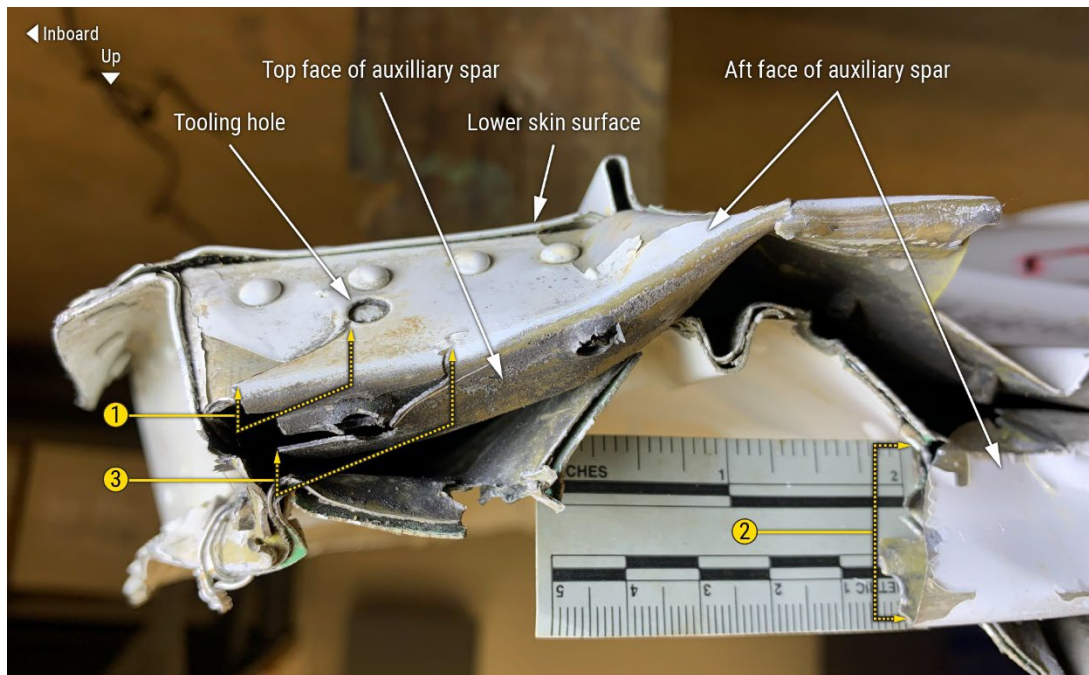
Photograph of the auxiliary spar for the left elevator, after the tab was removed, showing cracks "1", "2" and "3" (view looking forward).
